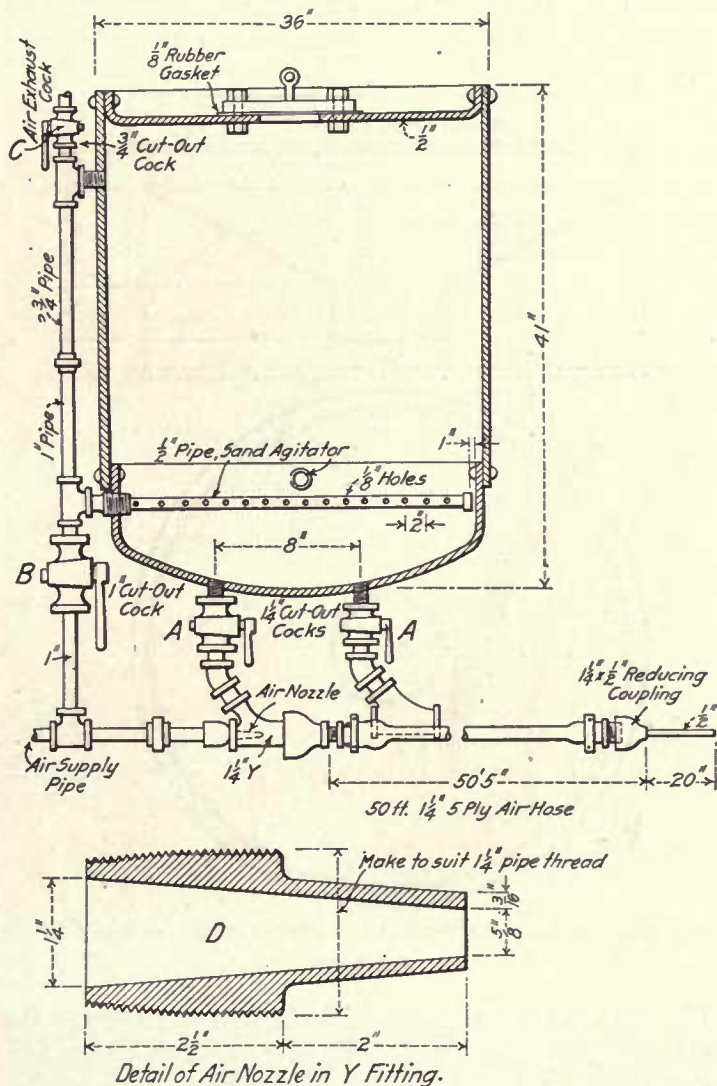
Sand Blast Machine for Cleaning Steel Cars and Locomotive Tenders.
